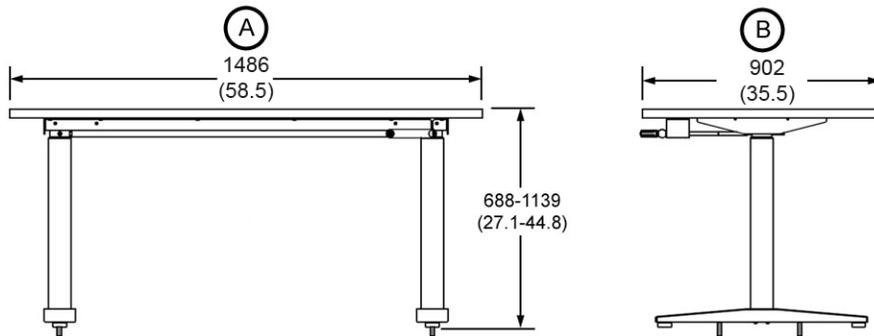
Operator Console Computer Dimensions (Open Console)
